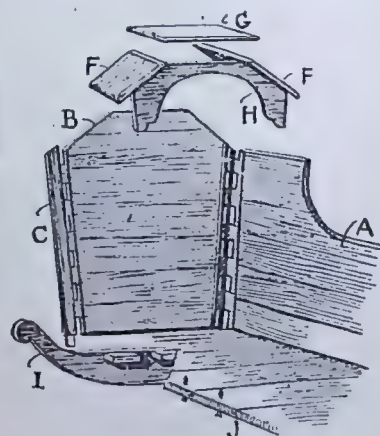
DETAILS, SHOWING METHOD OF CONSTRUCTION.
